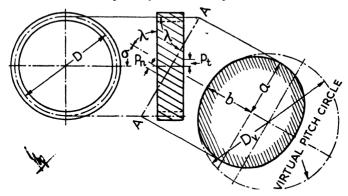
THE VIRTUAL SPUR GEAR OF A TYPICAL HELICAL GEAR
